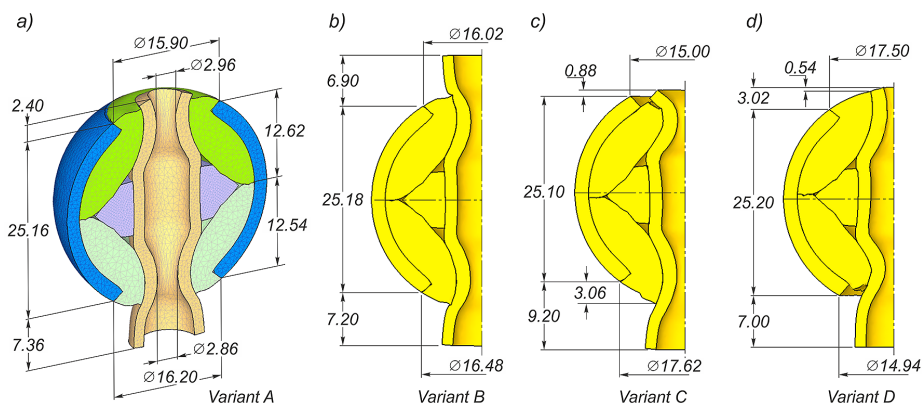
Shape and dimensions of the forging made of aluminum alloy and deformed inserts depending on the variant of the insert assembly setup
